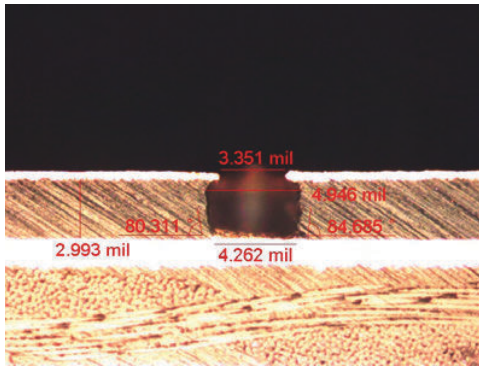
Cross-section of holes (9 μ m copper thickness) by laser ablation, 23+2+2mj
